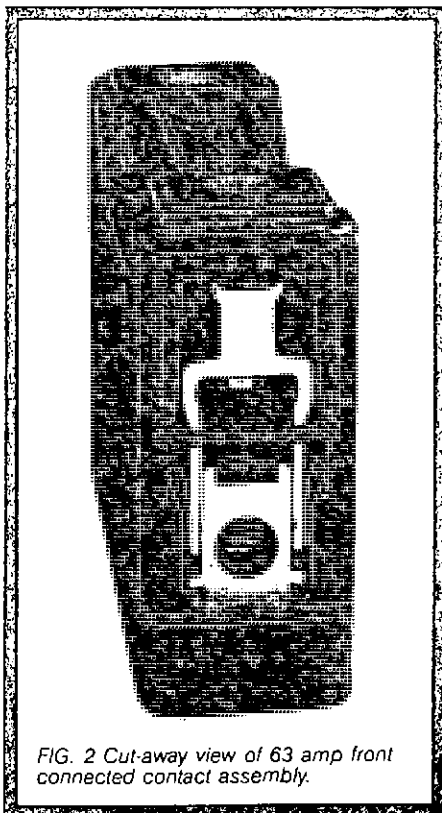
Cut-away view of 63 amp front connected contact assembly.
